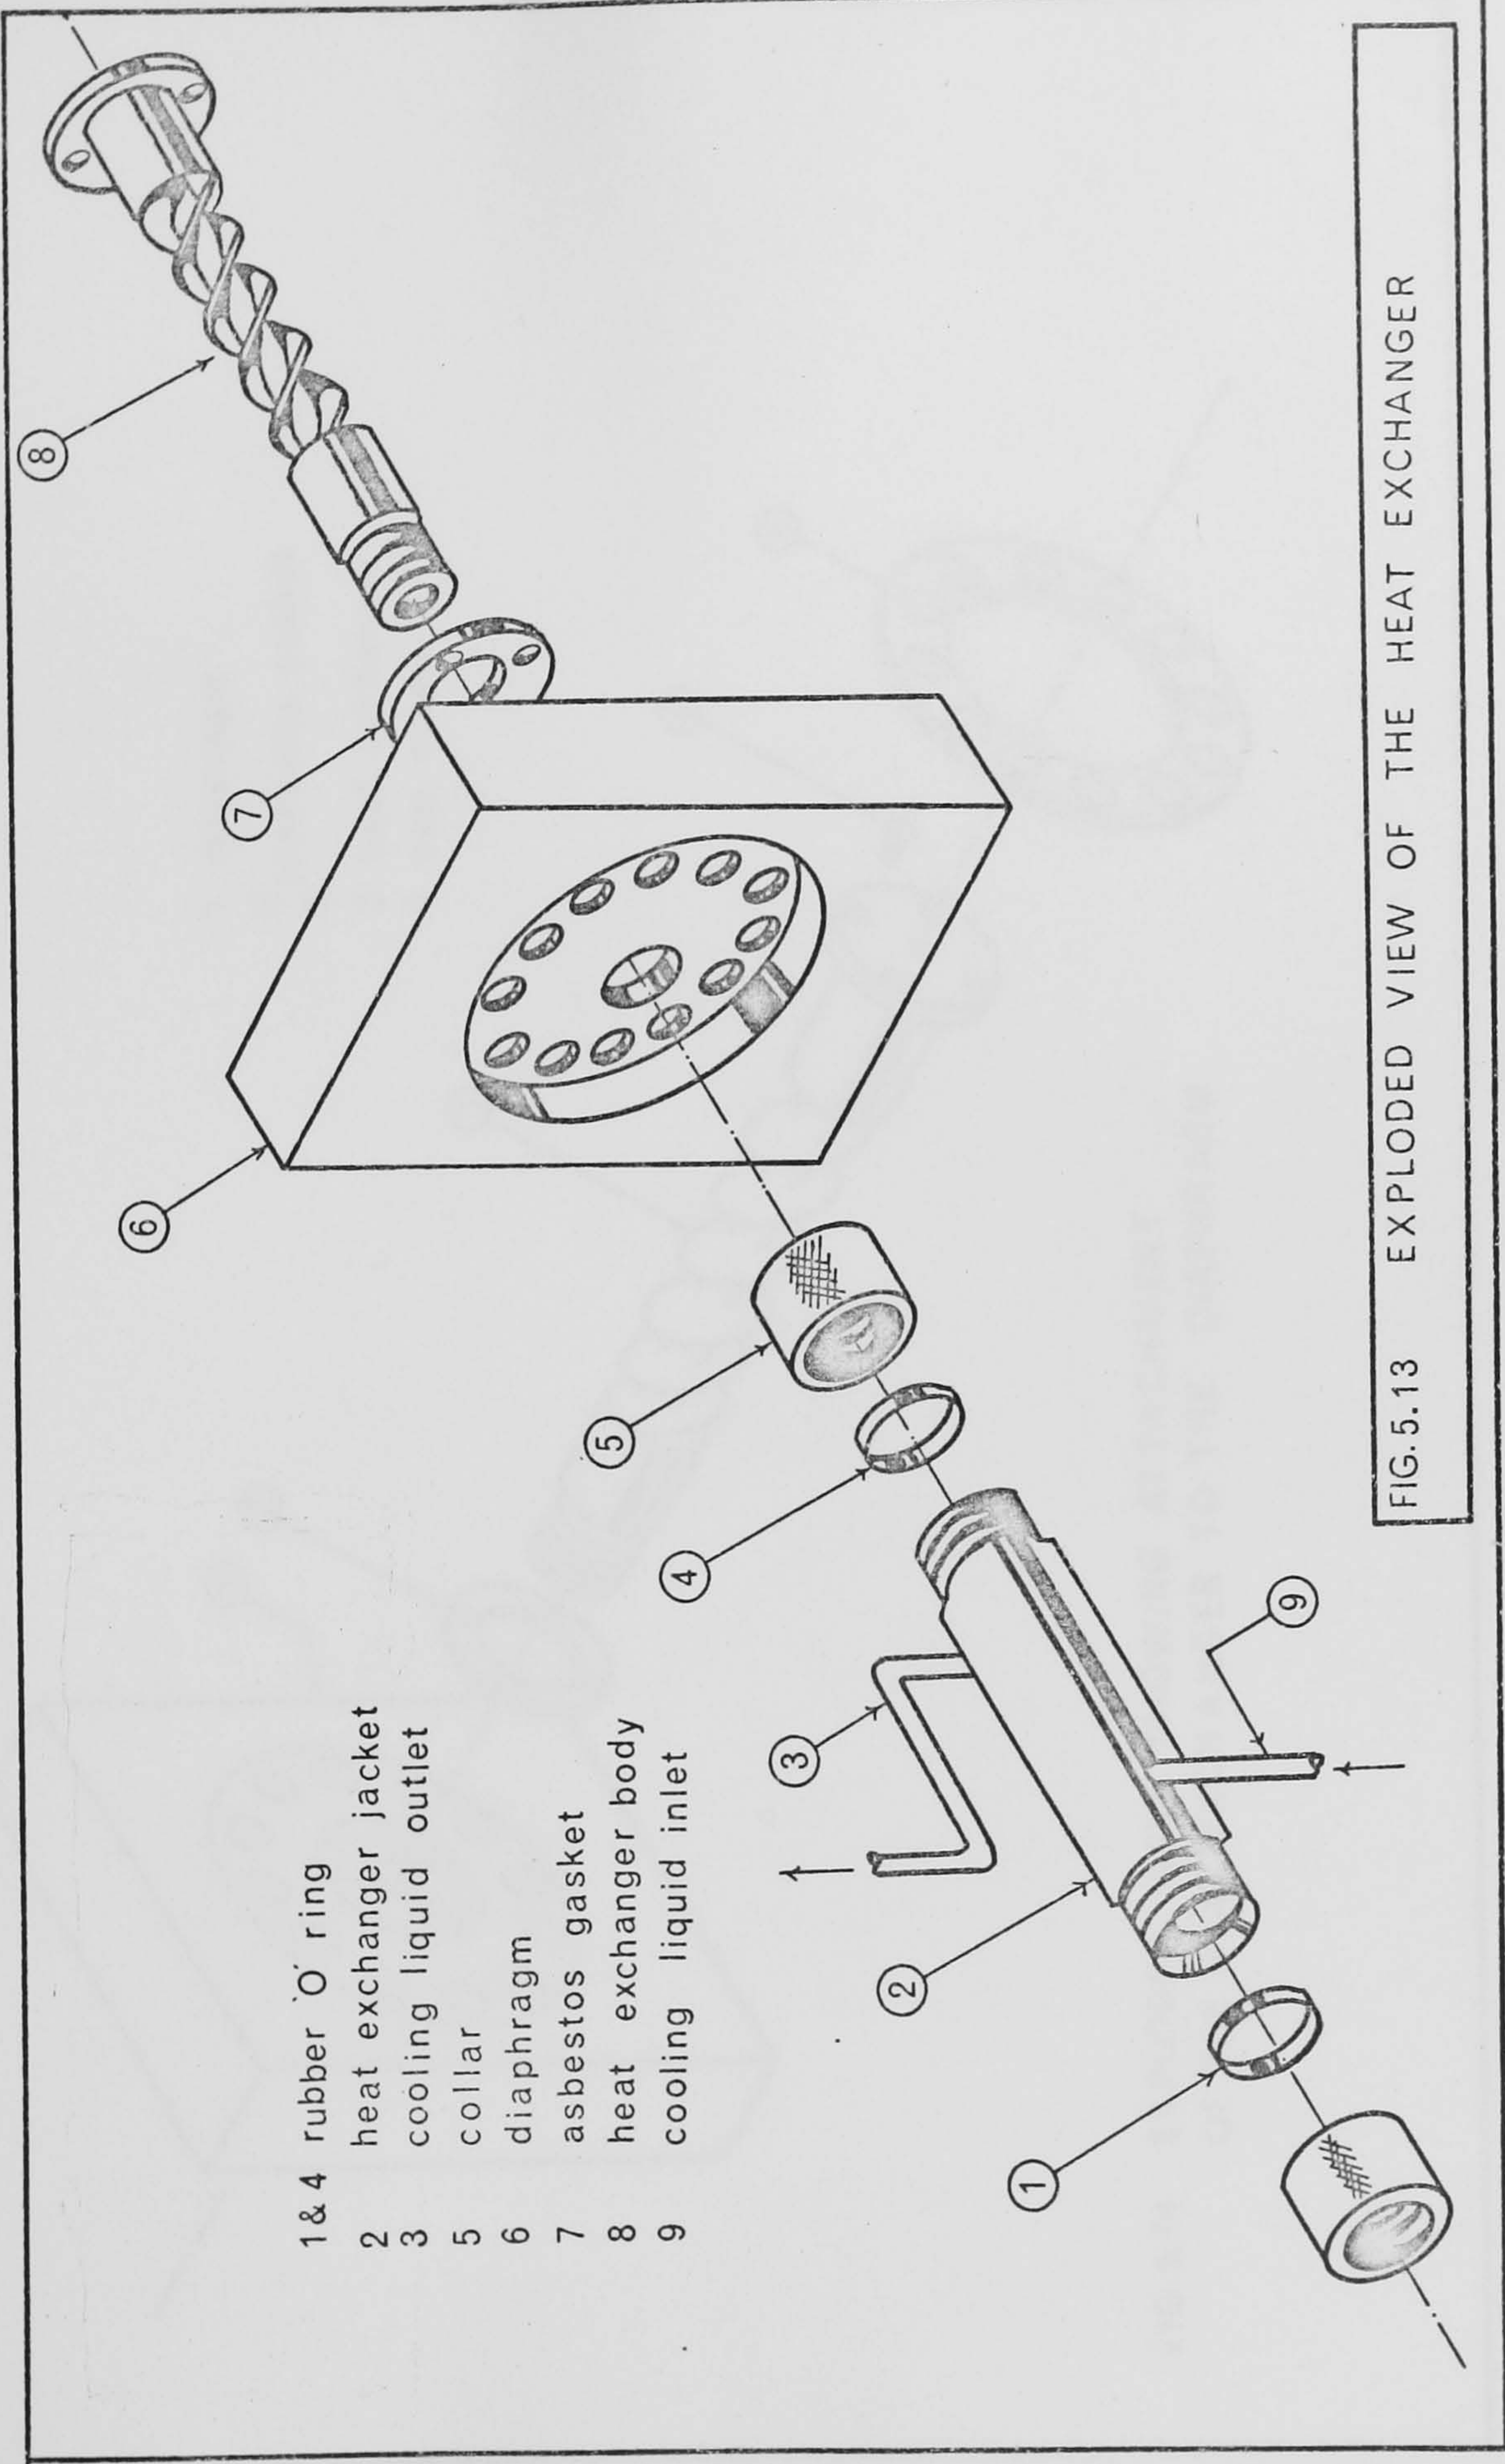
EXPLODED VIEW OF THE HEAT EXCHANGER
